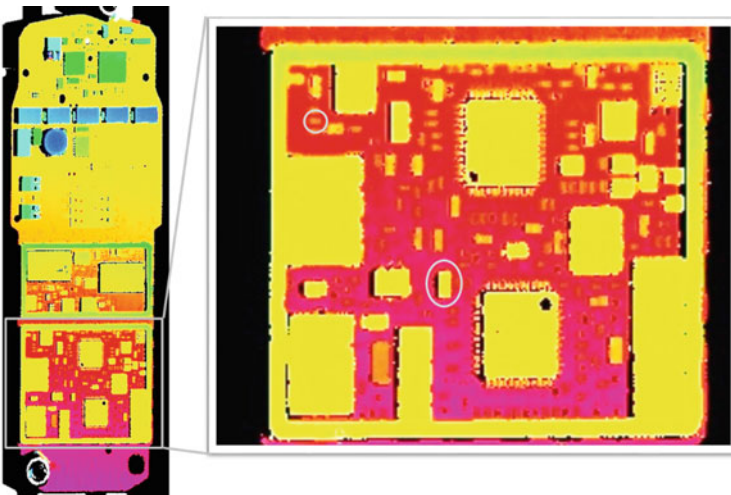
3D image of the PCB of a cell phone; heights are color-coded. Left: overall view of the PCB; right: enlarged section of the rectangle marked on the left image. Markings (white circle and ellipse) show SMD components with the dimensions $1 \times 0.5 \times 0.5$ mm³, $2 \times 1.5 \times 1.2$ mm³, respectively
